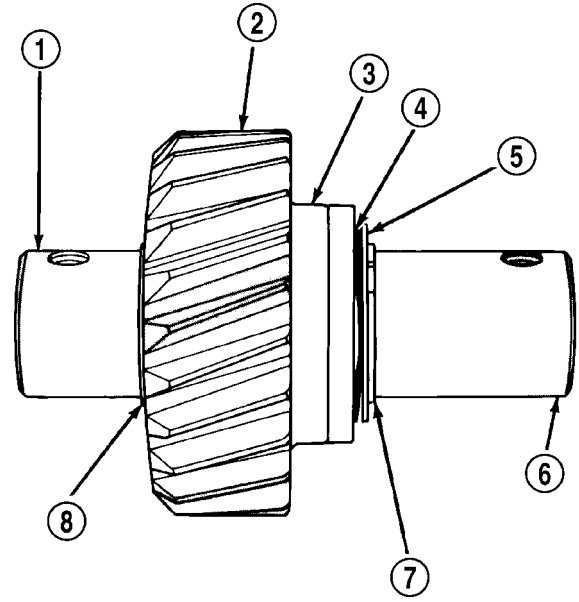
IDLER GEAR AND SHAFT ASSEMBLY
